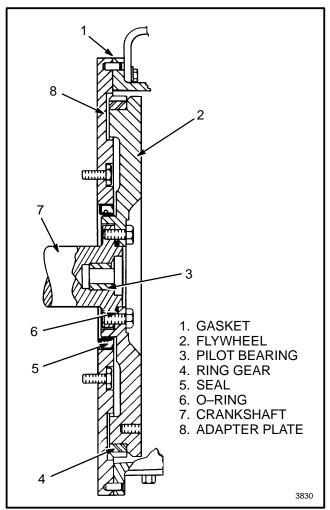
FLYWHEEL ARRANGEMENT FOR A TYPICAL OIL CLUTCH
